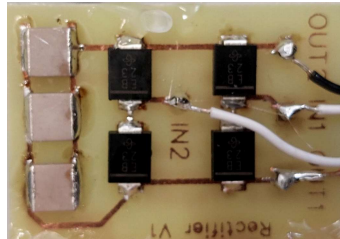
A.1.a : The PCB routing of the rectifier.
